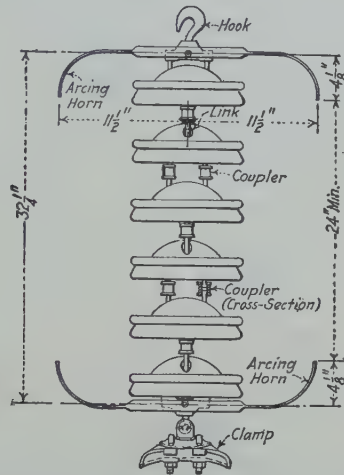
Six unit 10-in. Hewlett suspension insulator string and hardware for 110,000 volts—Turners Falls Power Company.
